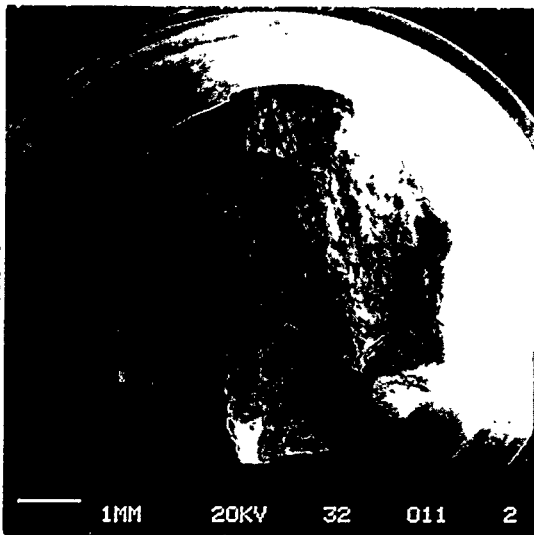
The fractograph of the fracture surface of the specimen with orientation C, high oxygen content environment, weld metal.
